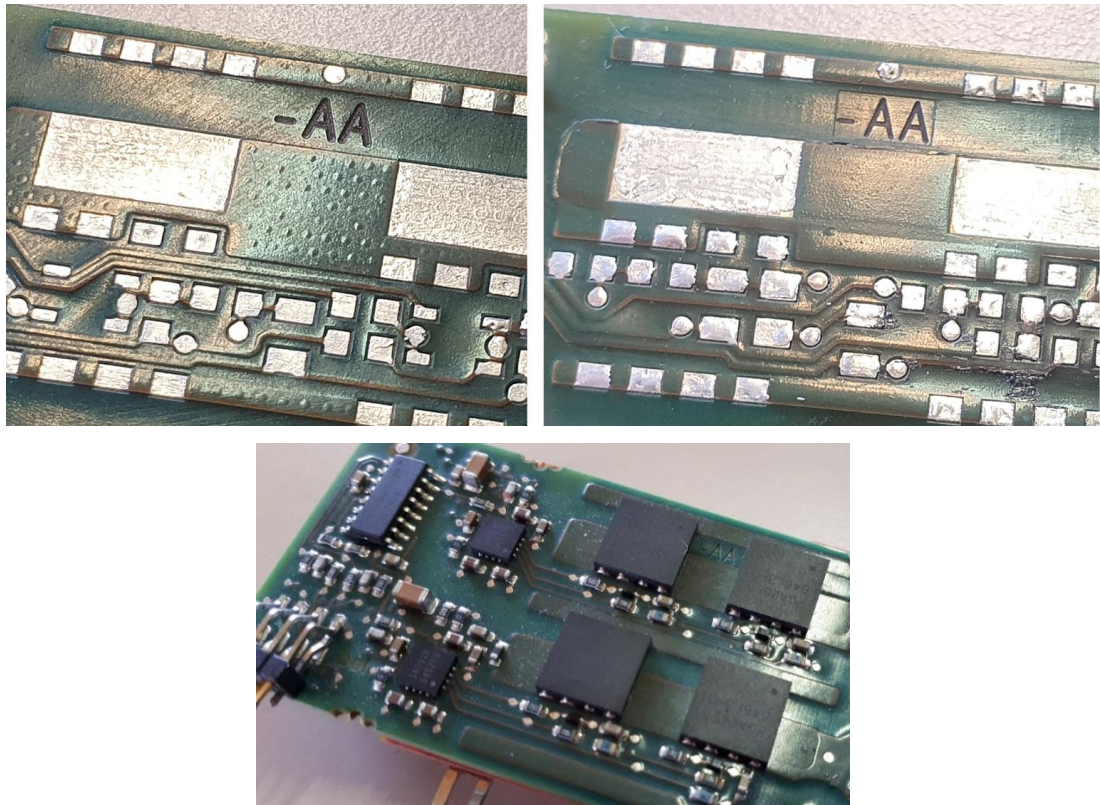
Pictures of prototypes – printed circuit board with thermal vias technology (left), PCB with copper inlay (right) and assembled prototype
